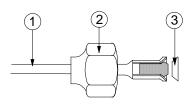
Style 50 (incl. valve depressor mounted into machined flare)
